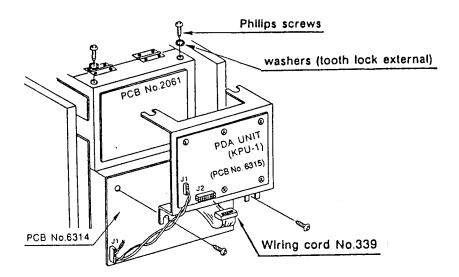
Location of PCB No. 2061, PCB No. 6314, and PCB No.6315 (option)
